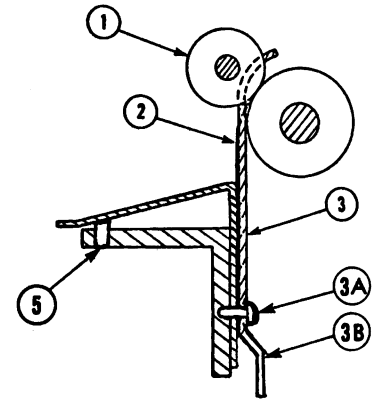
FEEDER PLATE SPRING - LEFT SIDE VIEW
